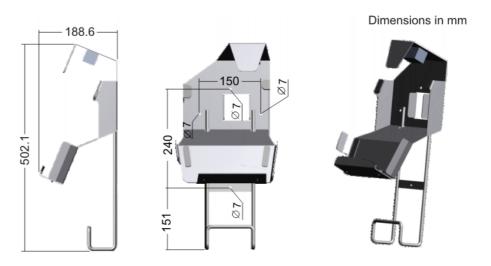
Dimensions and drilling locations for smartPAD holder
